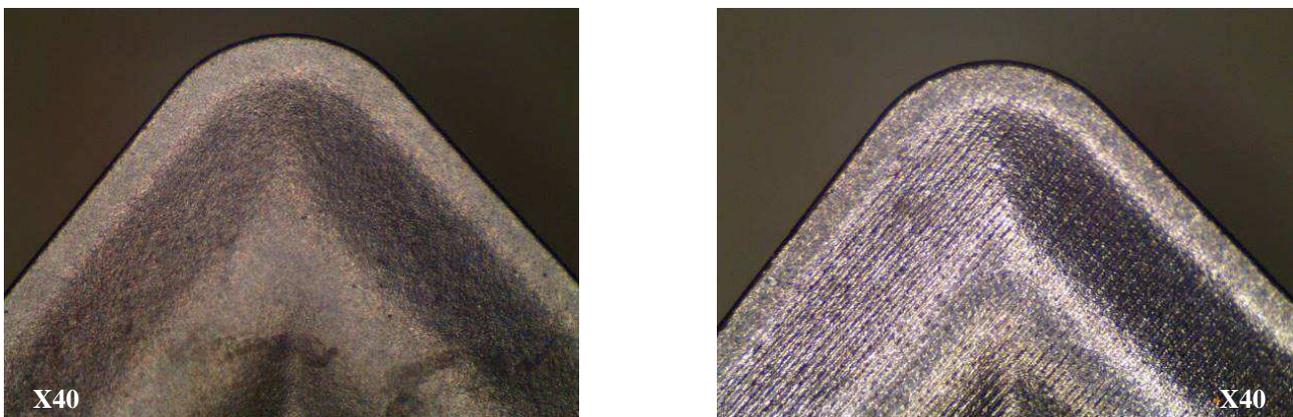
Detail of the rake face tools of TiAlN-blasted (left) and TiAlN-laser (right).
